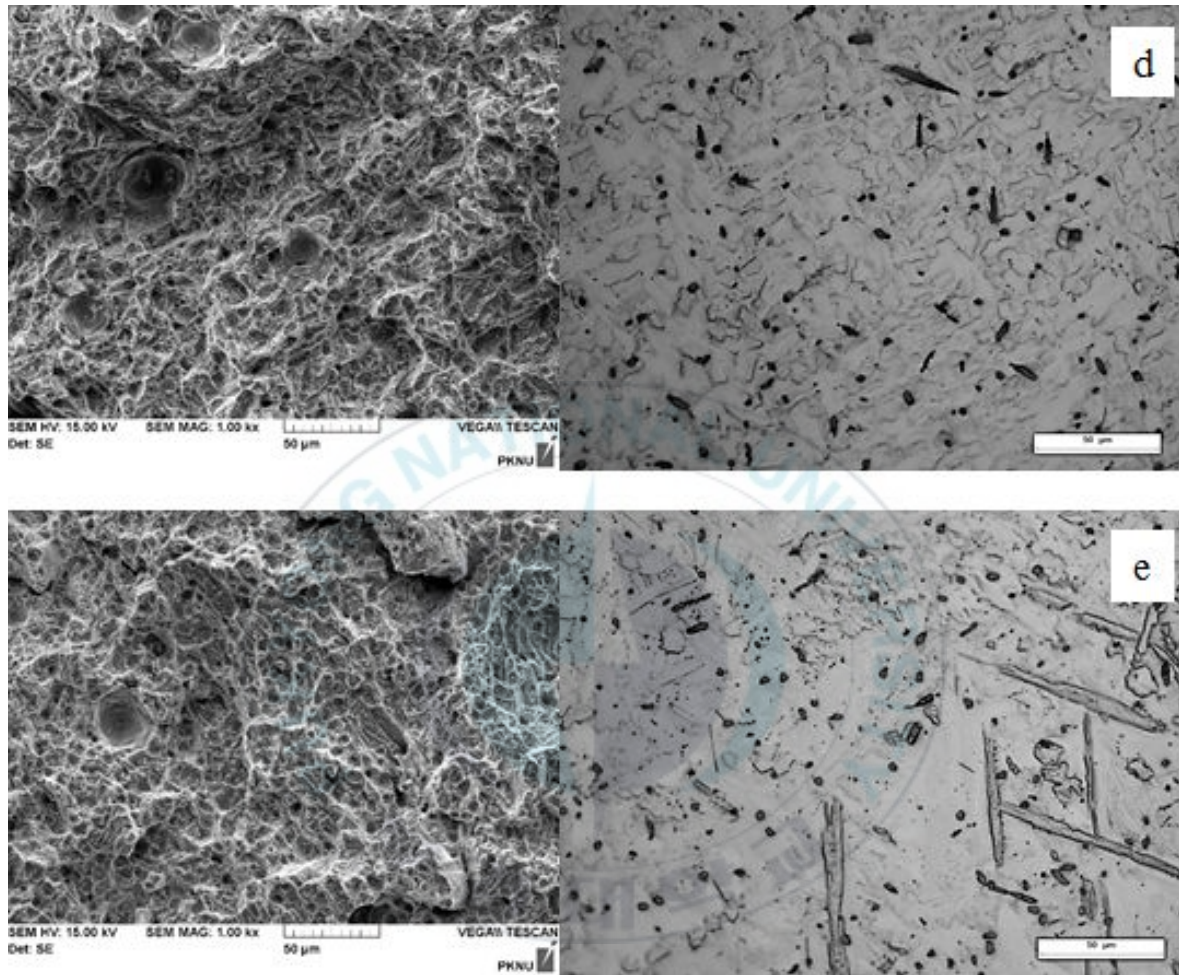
Tensile fracture surface and optical microstructures of centrifuged specimens
